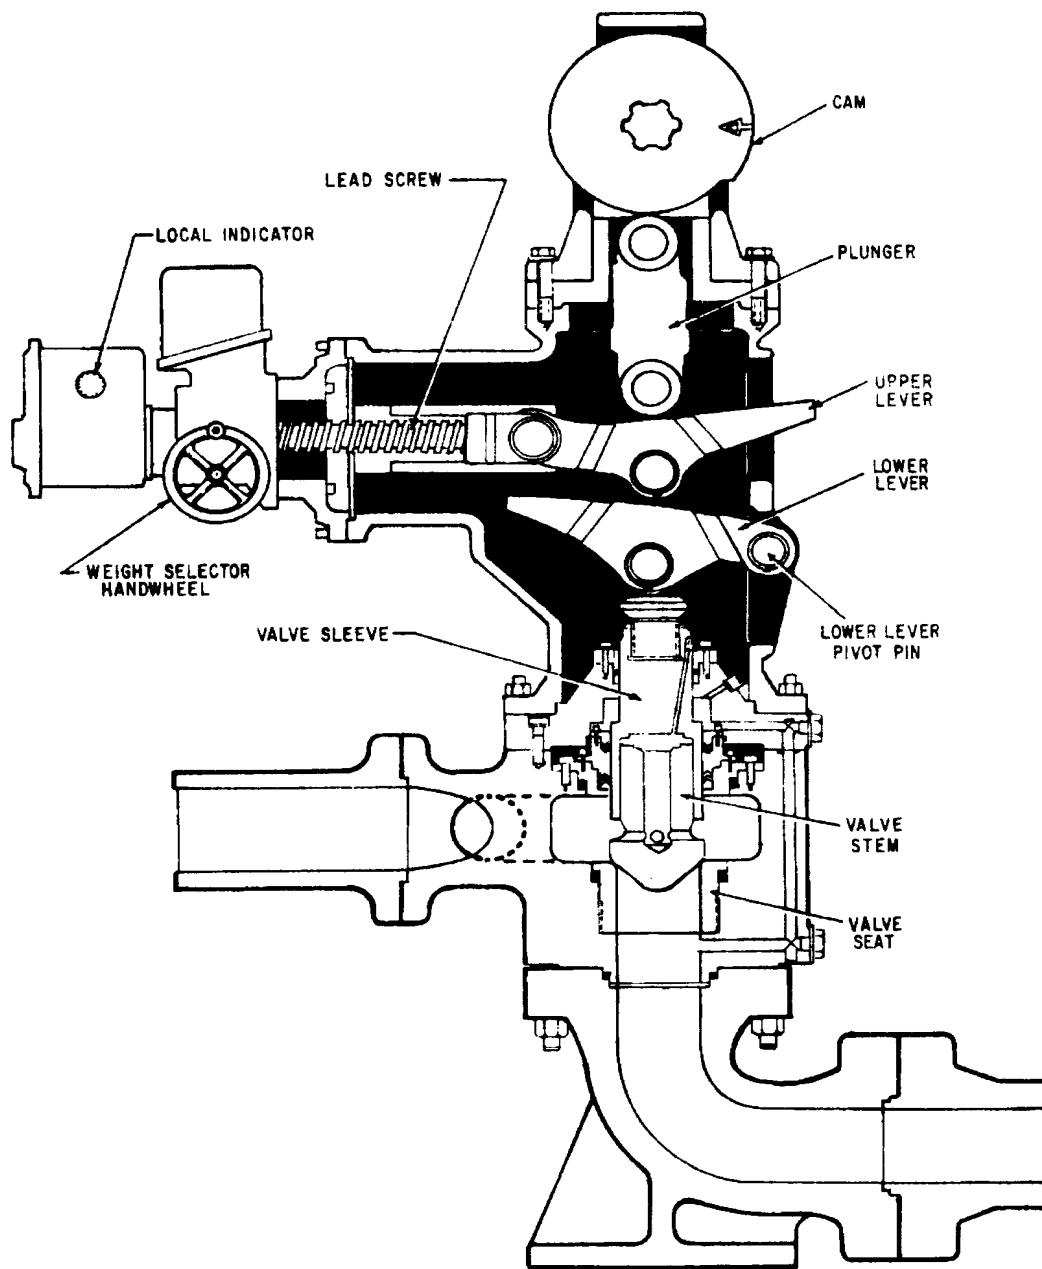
Sectional View of the MK Mod 3 Control Valve
